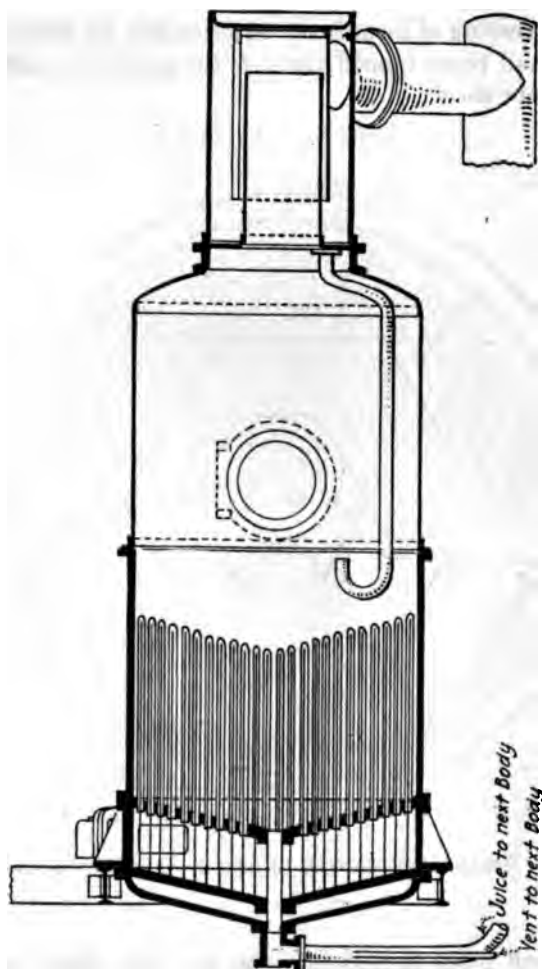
DOUBLE-TUBE EVAPORATOR (TYPE G)
